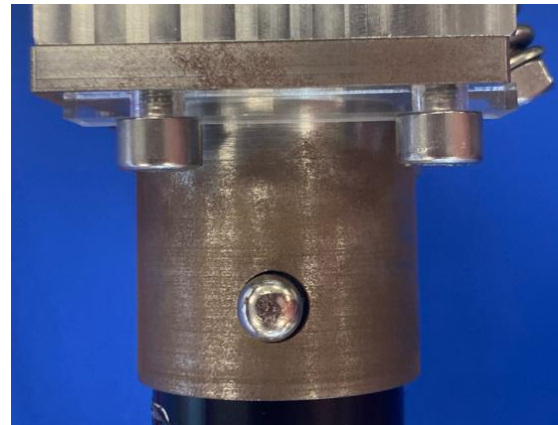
Manufactured design of the tibia mounting plate, machined from mild steel.
